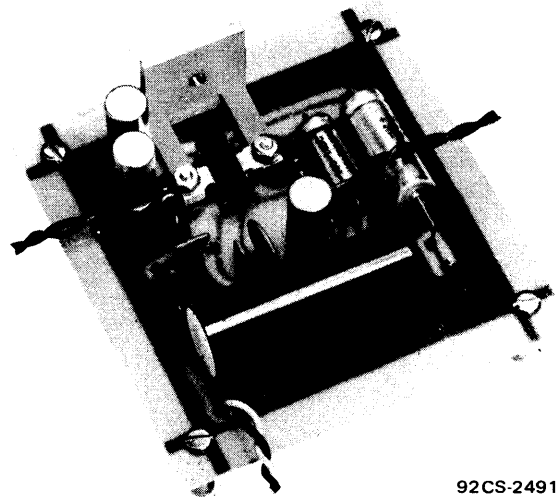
Bottom view of printed-circuit boards shown in Figs. 5 and 6.
